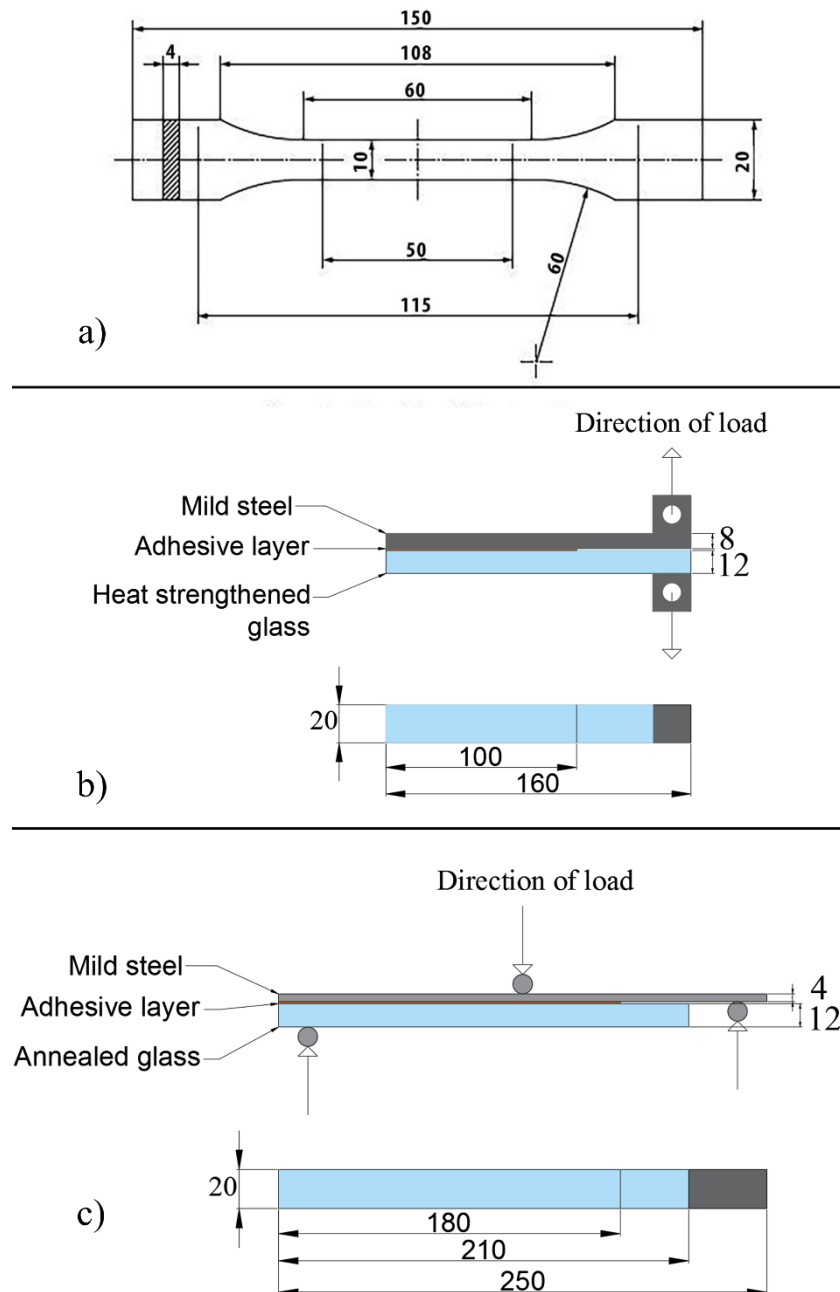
Designs for a) dogbone, b) DCB and c) SLB specimens. Dimensions in mm.
